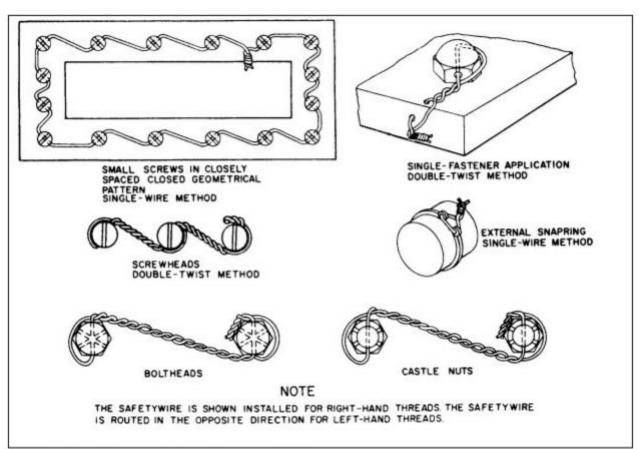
Securing screws, nuts, bolts, and snaprings.
